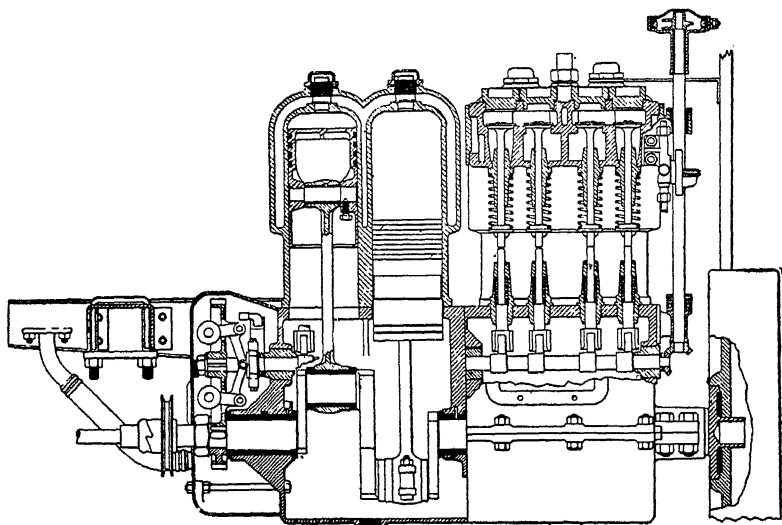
PART SECTIONAL ELEVATION OF THE PACKARD FOUR-CYLINDER ENGINE.
